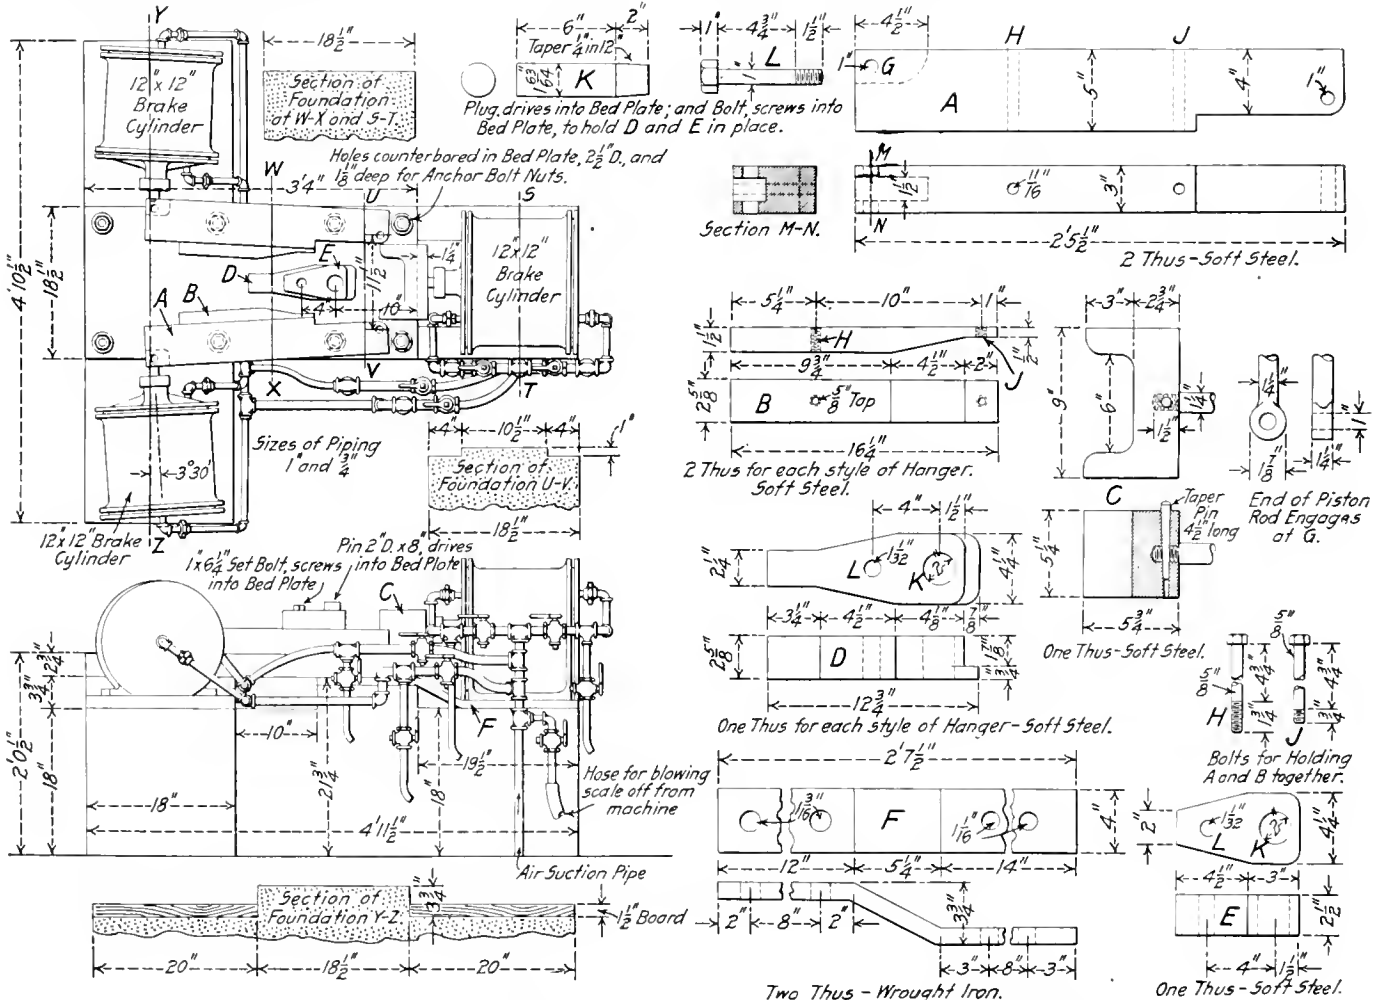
General Arrangement and Details of Bending Machine for Brake Hangers.
